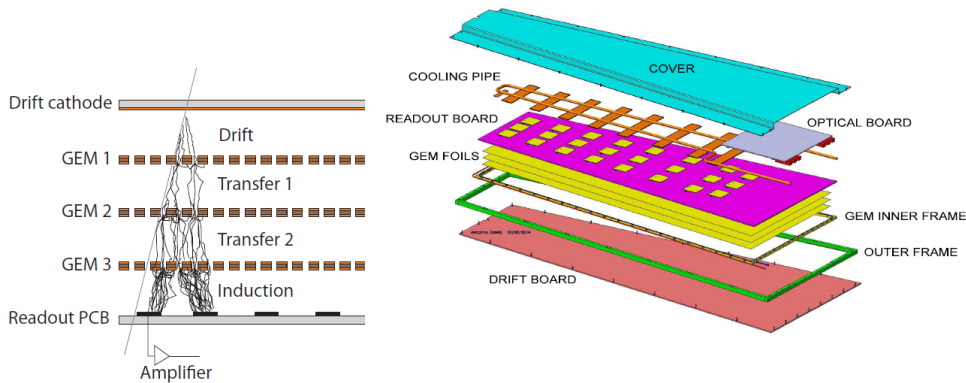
Scheme of a Triple-GEM chamber with three foils (left) and its exploded view of the mechanical design [88].
